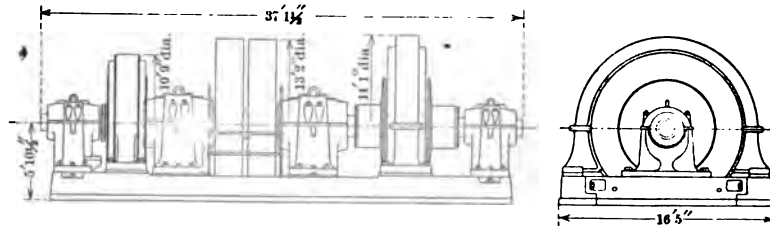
General layout of flywheel motor-generator set supplying power to roll motors
